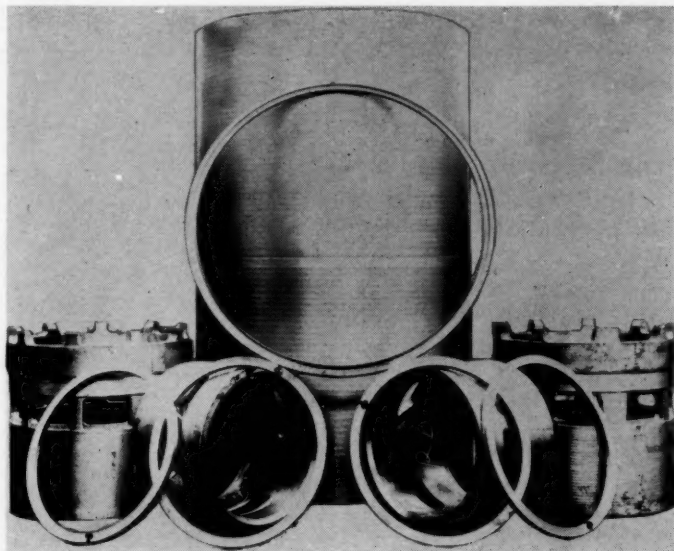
GROUP OF LOCOMOTIVE CASTINGS SHOWING CYLINDER BUSHING, VALVE BUSHINGS, PISTON RING AND VALVE RINGS. (MARKS SEEN ON THE CASTINGS ARE NOT DEFECTS, BUT ARE TAR PICKED-UP IN ROLLING THE CASTING INTO POSITION.)
